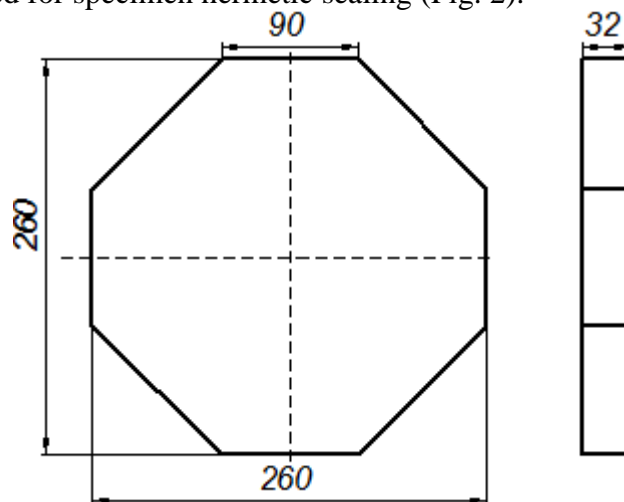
Steel plates for specimens II ... I4 sealing. (Dimensions in mm).
